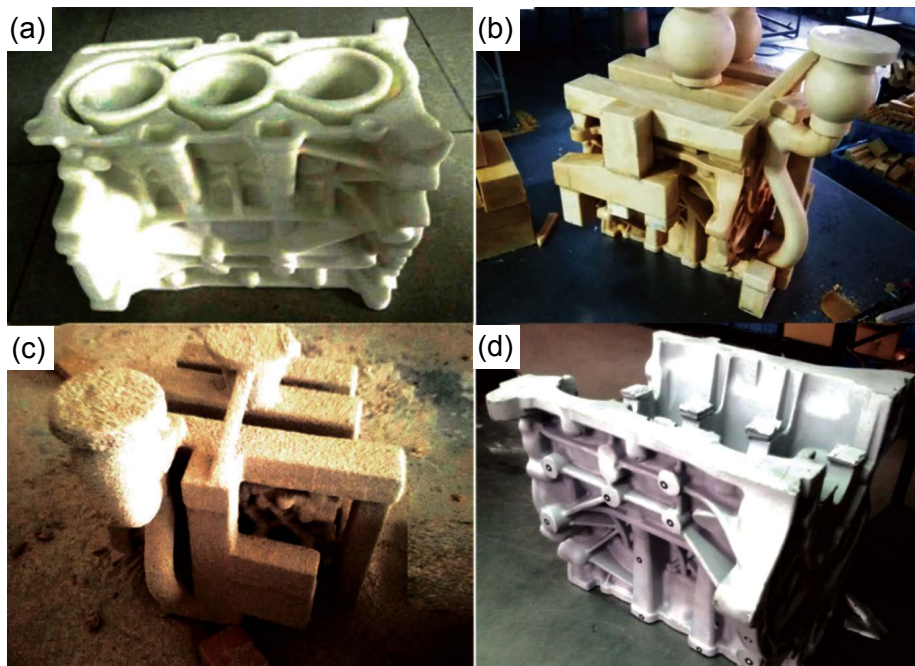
SLS combined with investment precision casting: (a) wax pattern of SLS cylinder body; (b) wax pattern assembly; (c) shell making; (d) cylinder block casting^[12]
